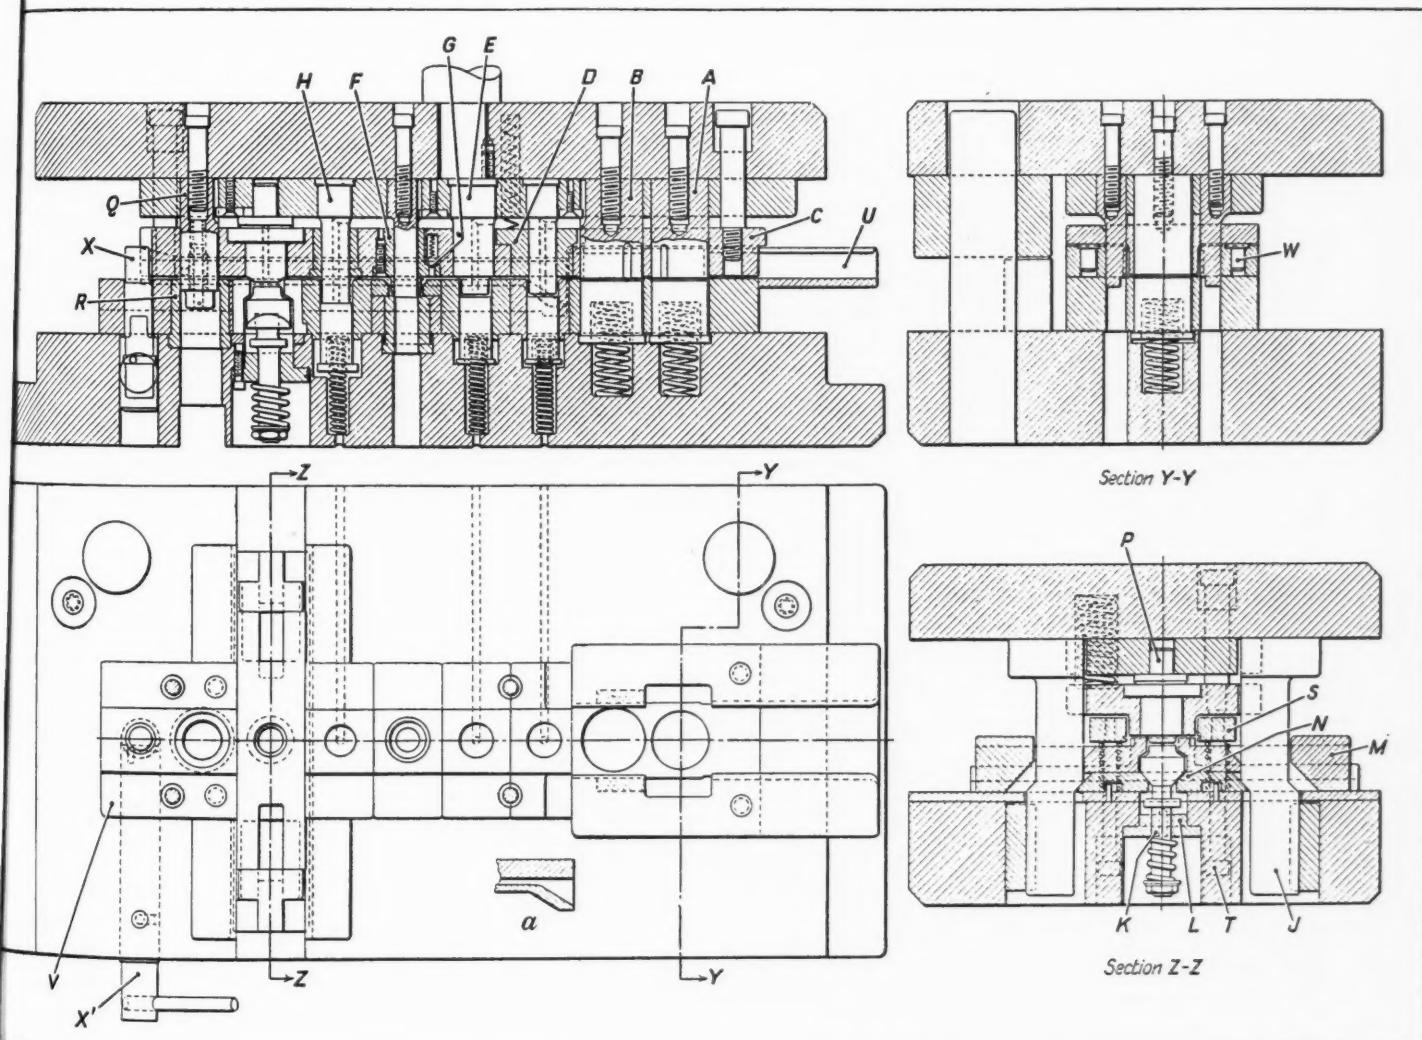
Progressive die employed for drawing and flaring tubes in the sequence shown in Fig. 5.
